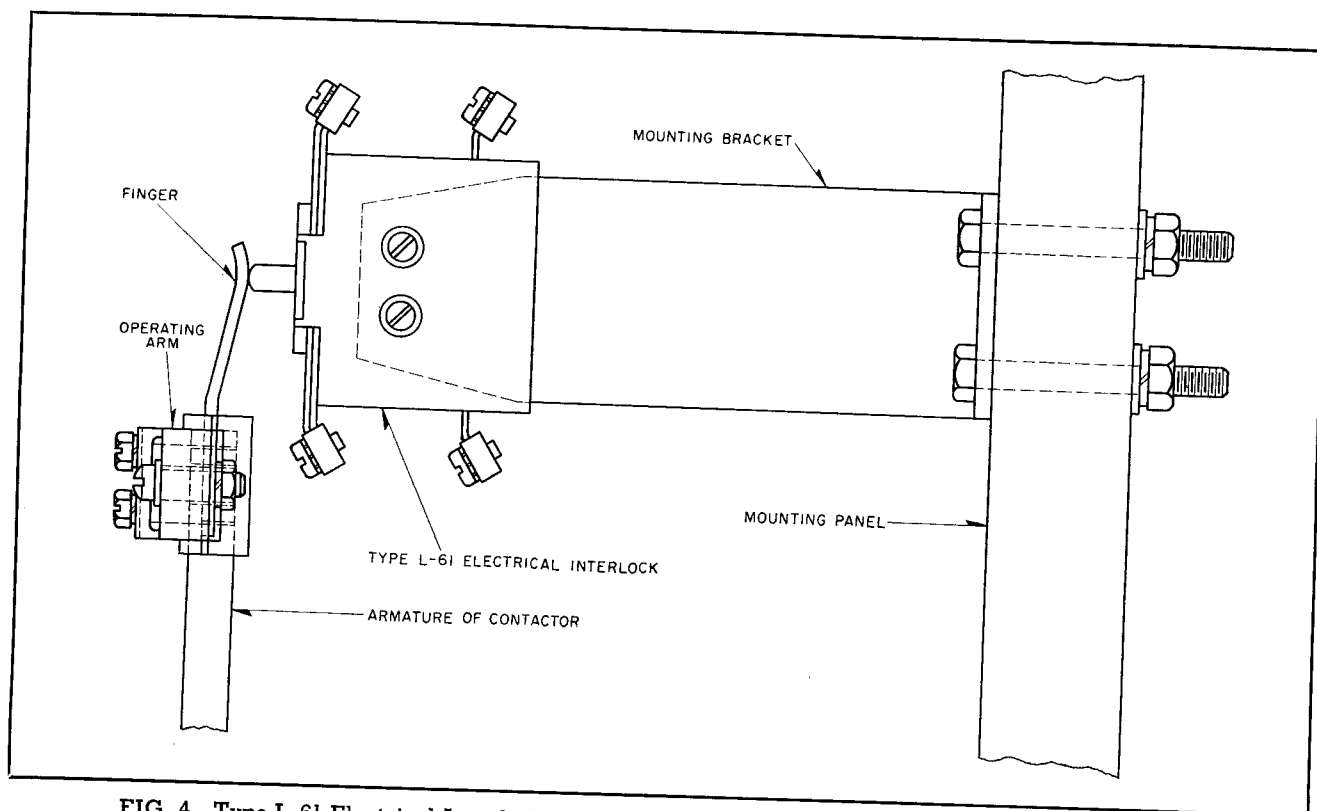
Type L-61 Electrical Interlock for Magnet-Closed Contactors M-810, M-810-R and M-910
